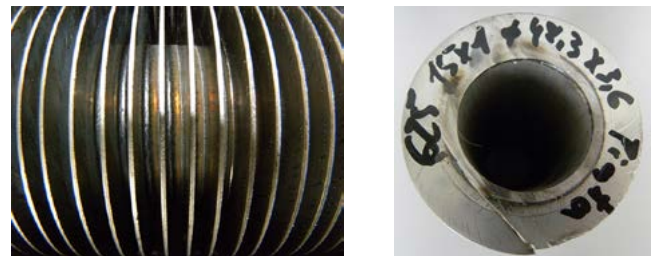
Laser welded Inconel 625 alloy ribbed pipes: a) pipe-rib weld face, b) joint cross-section
